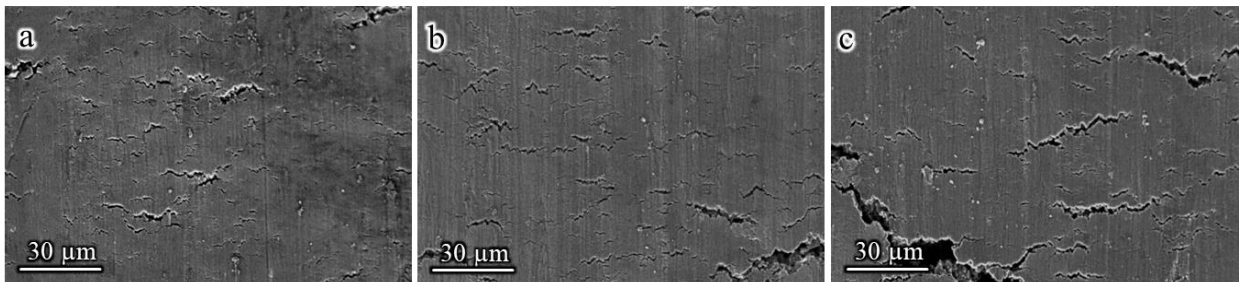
Surface morphology of extrudates produced by a zero-bearing die using A612 with an extrusion speed of (a) 26 mm/s, (b) 28 mm/s, and (c) 29 mm/s.
